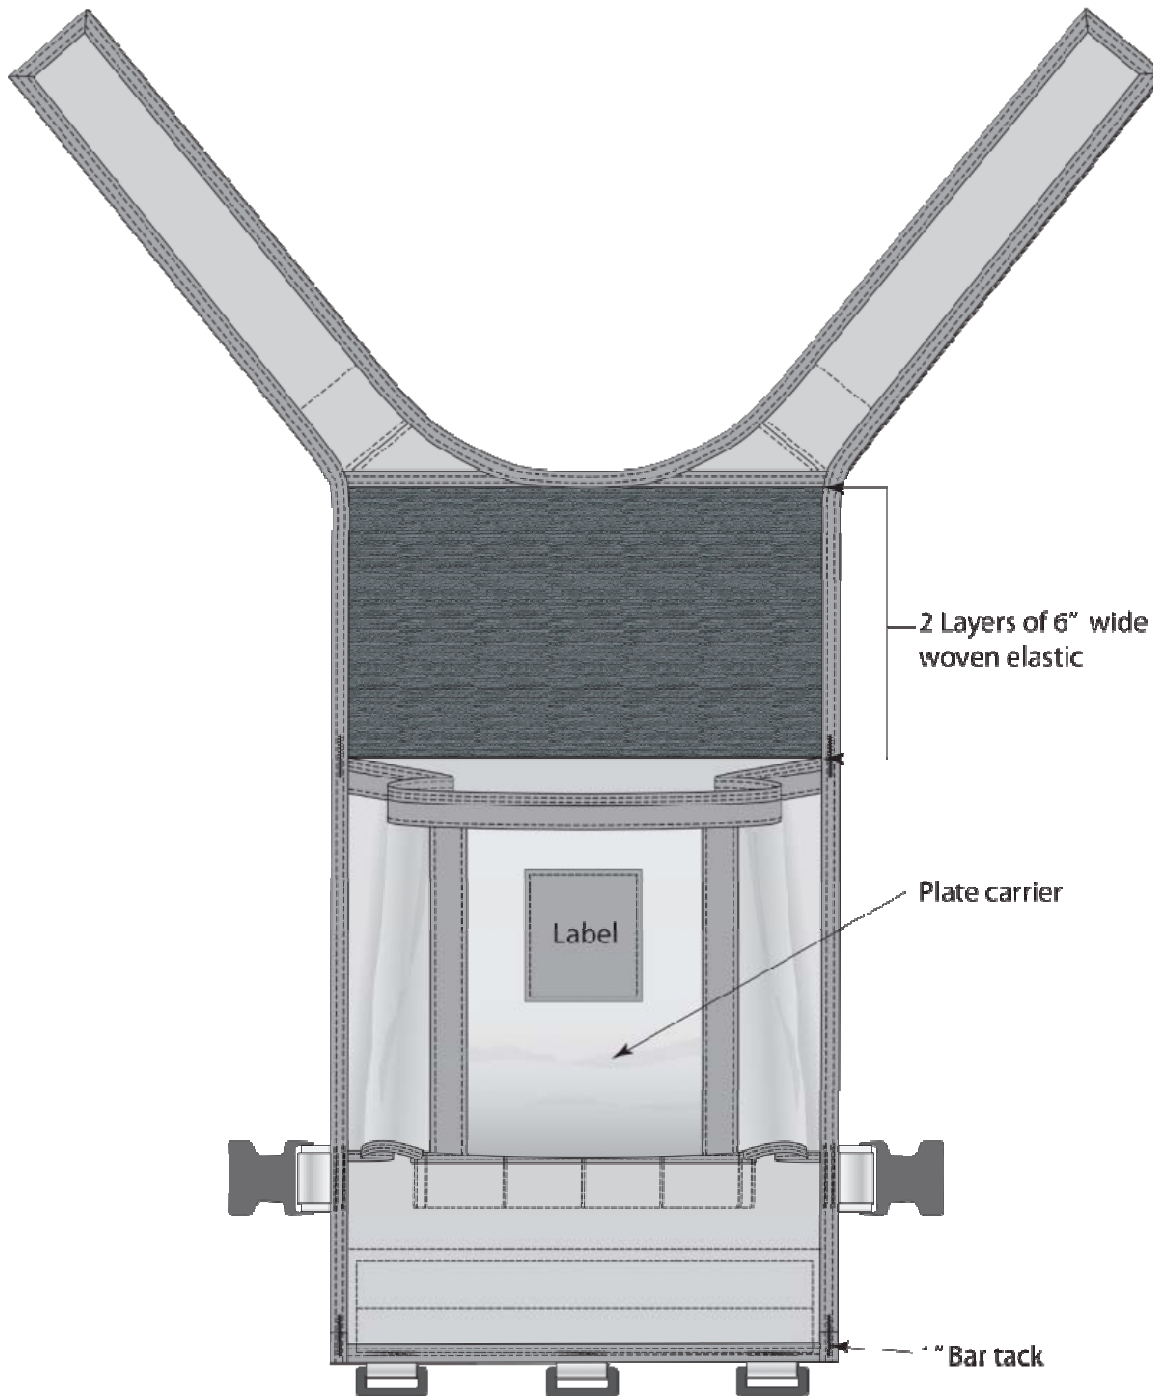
MLCS Chest Rig Front View Showing Shoulder Tab Detail
